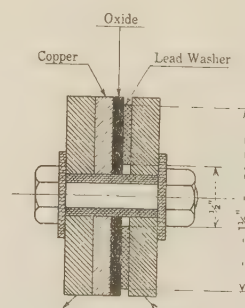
ASSEMBLY OF SINGLE HALF WAVE RECTIFIER
